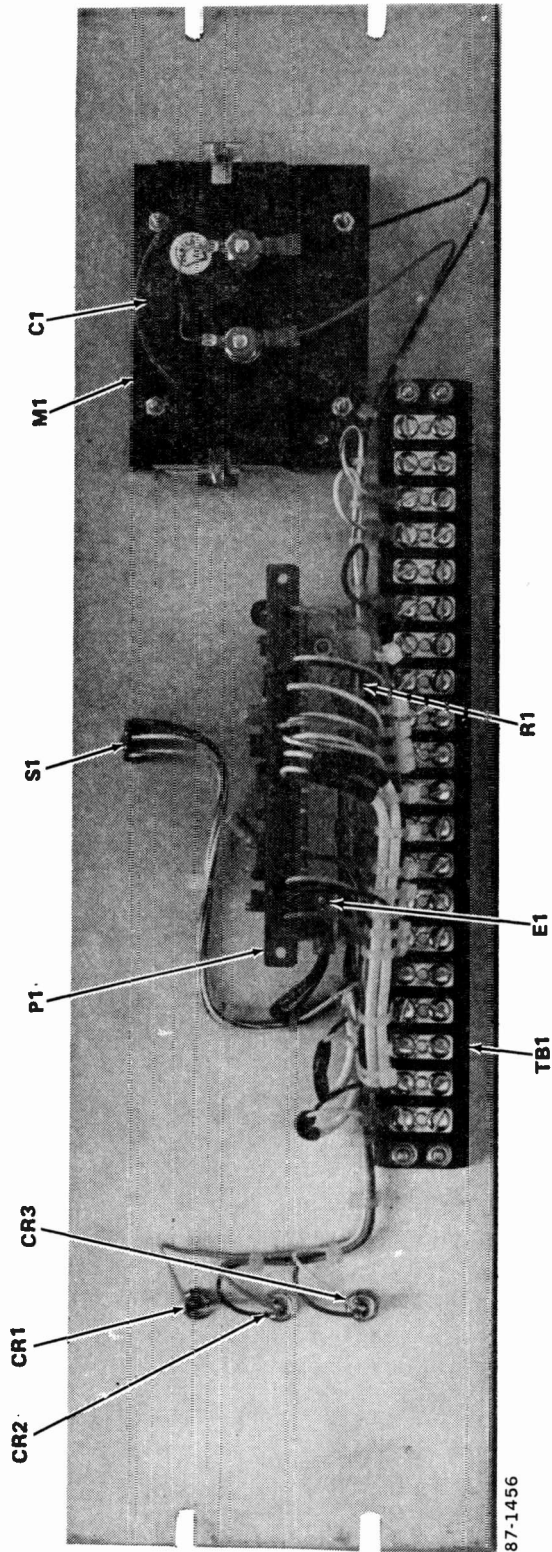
IPA Metering Panel, A27 (Sheet 2 of 2)
